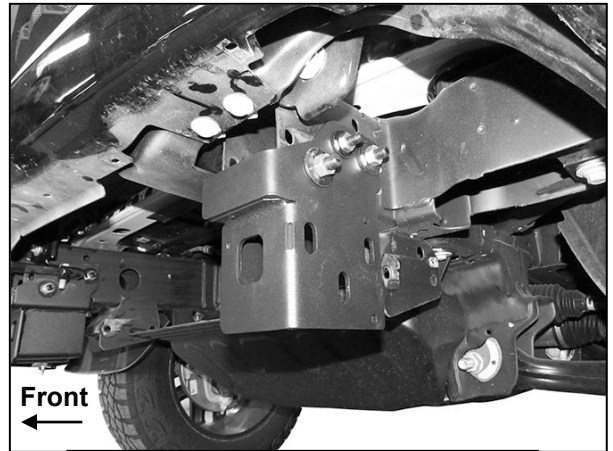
Insert (1) Left and (1) Right 12mm/10mm Bolt Plate into end of frame and out through driver/left Mounting Bracket
